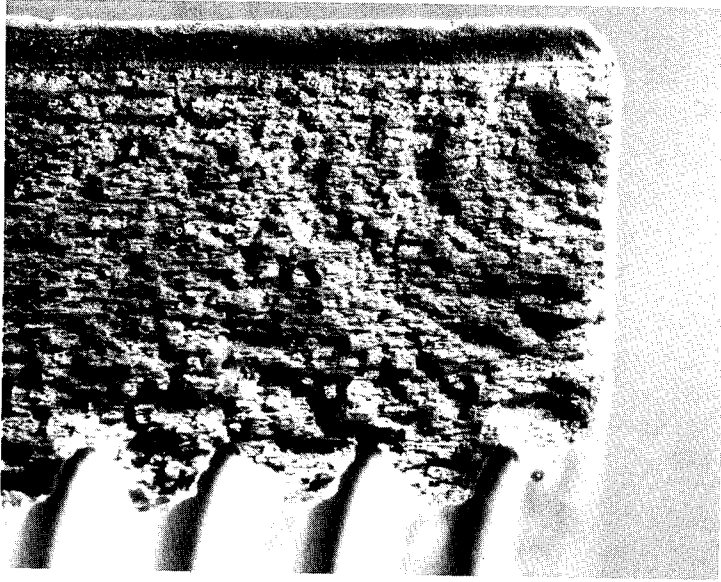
Fractograph showing crack arrest lines emanating from the base of the forming seam. Mag. 20x.
